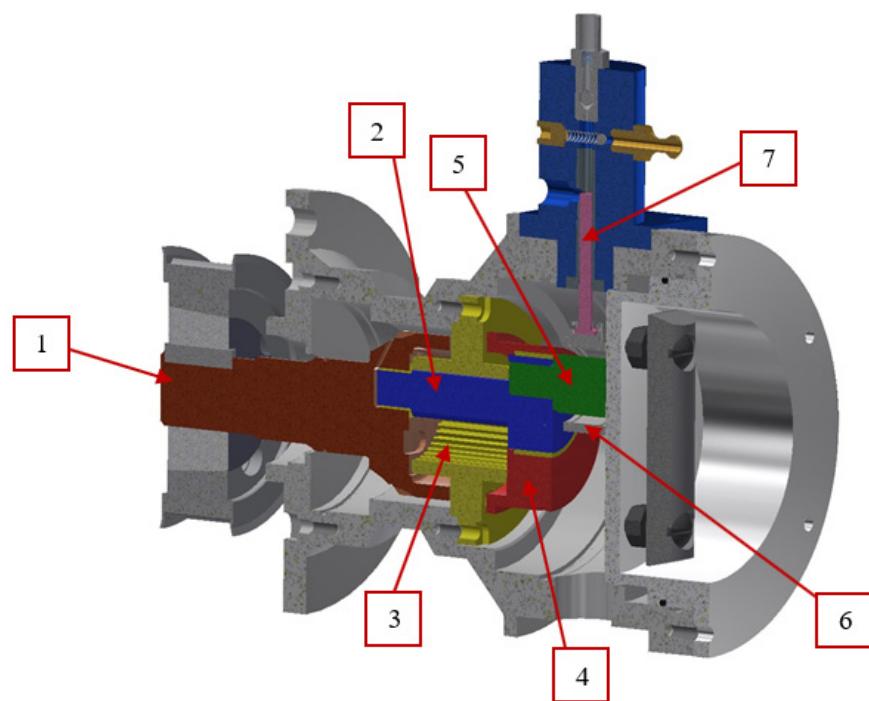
A simplified model of a hypocycloidal pump showing the most crucial components of the design: 1—main shaft, 2—countershaft, 3—toothed wheel, 4—support, 5—mandrel, 6—mount, 7—plunger.
